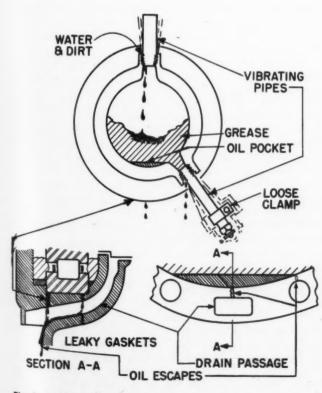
Tight drain and grease pipes and good gaskets are a "must" on antifriction bearings
